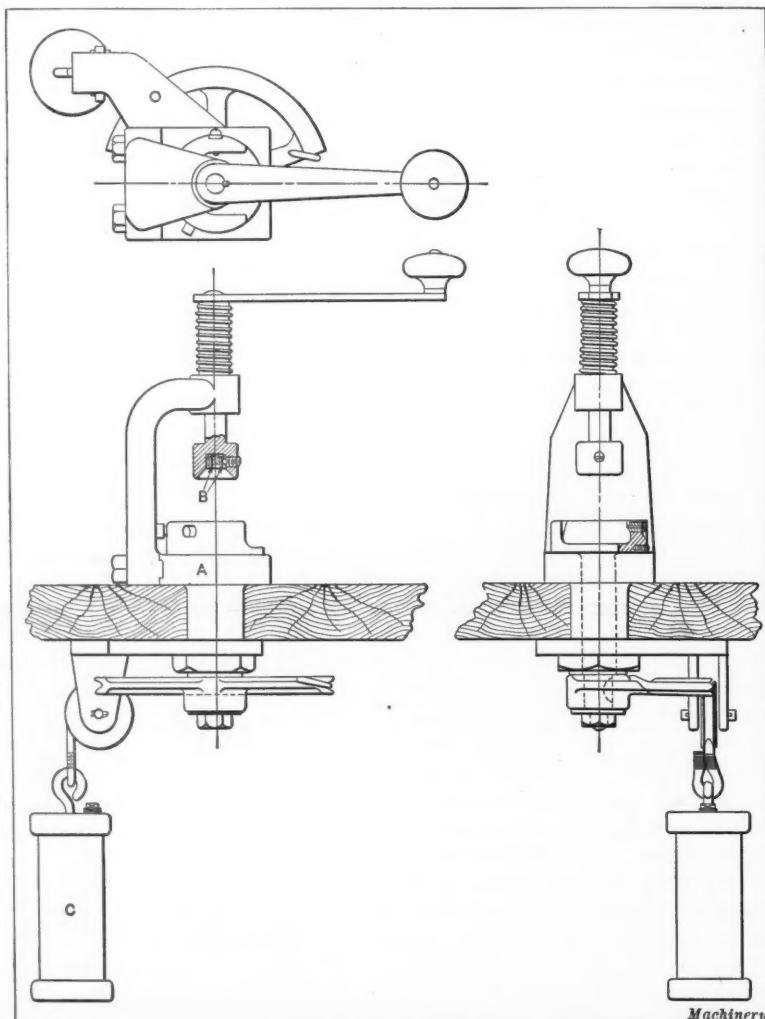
Device used for screwing on Fuse Caps, which is arranged to regulate Friction or Tension
